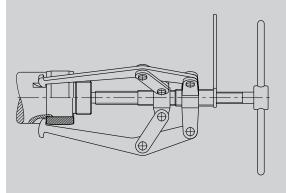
Dismounting of Inner Ring of Cylindrical Roller Bearing by using a Extraction Tool
